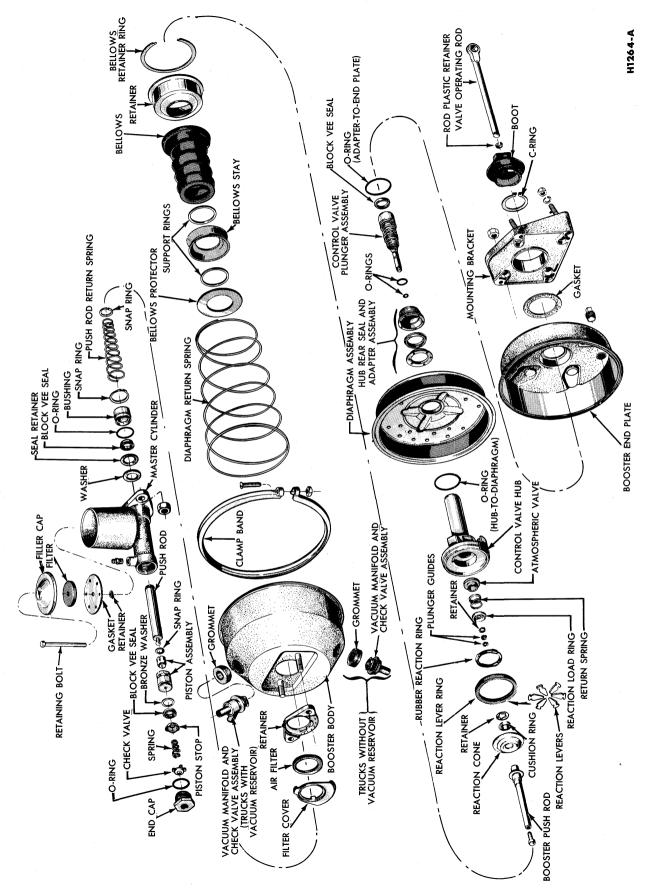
Bendix Dash-Mounted Booster Disassembled
